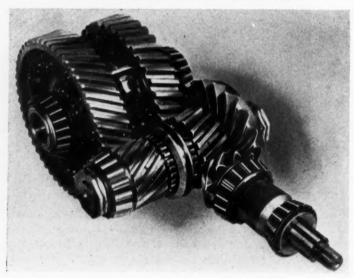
Spiral bevel gearing for a truck rear axle assembly employs nine parts of NE 8720, carburized and hardened
